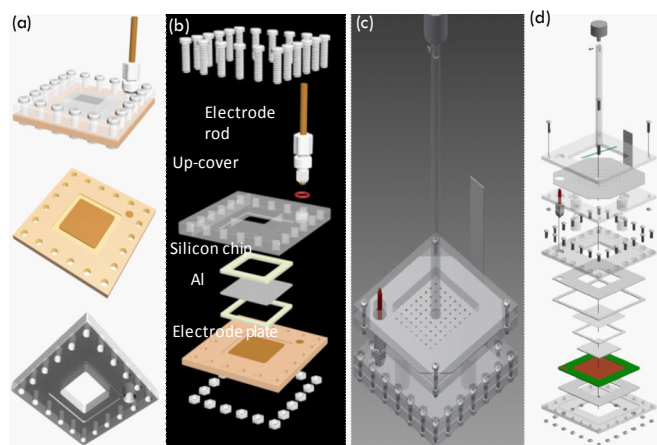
The assembled electrochemical mold made of acrylic; (a) anode mold, (b) exploded view of anode mold, (c) a cathode-anode mold with a motor as a stirrer, (d) exploded view.
